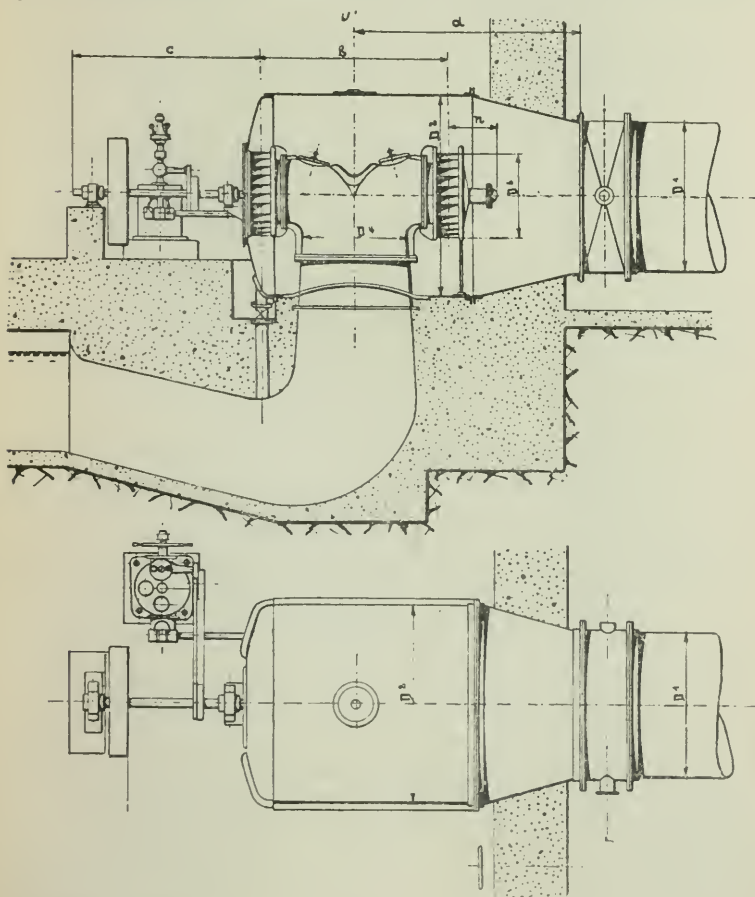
A.—DOUBLE FRANCIS TURBINE WITH HORIZONTAL SHAFT, AXIAL ADMISSION.
